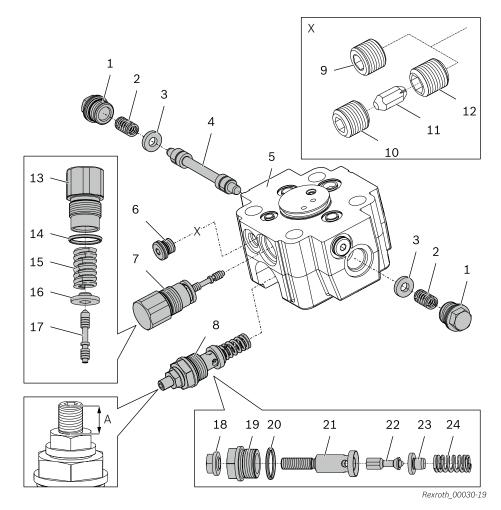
Disassembling the cover with flushing and boost pressure valve
